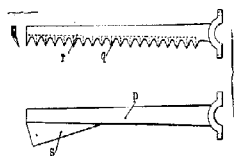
Denker and Hartmann's Mechanical Remover of Superphosphate from "Den" (detail).
